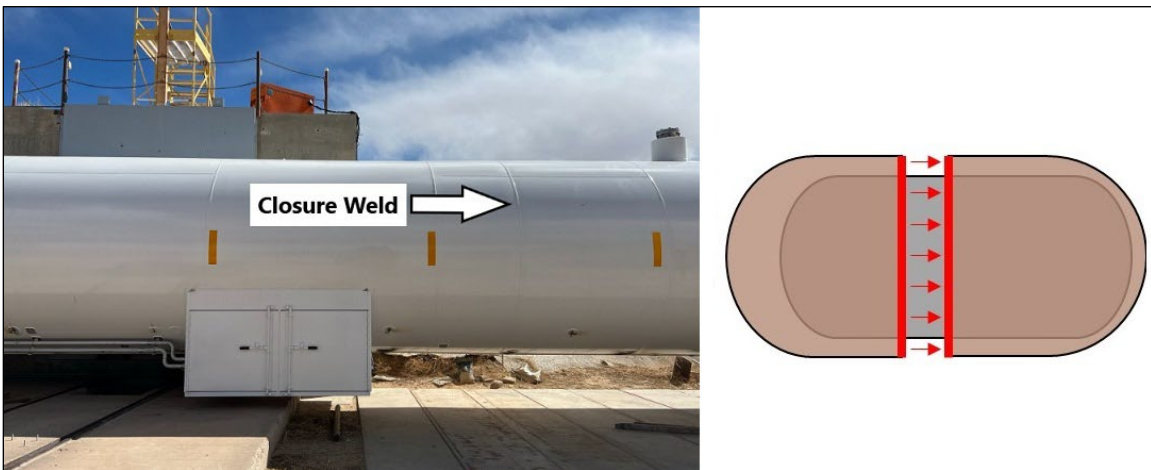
Photo of Closure Weld (left) and Diagram of Nesting Process (right)
